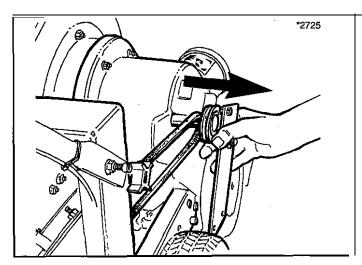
Pull Drive Pulley Bearing Plate And Slide Drive Belt Off Pulley
